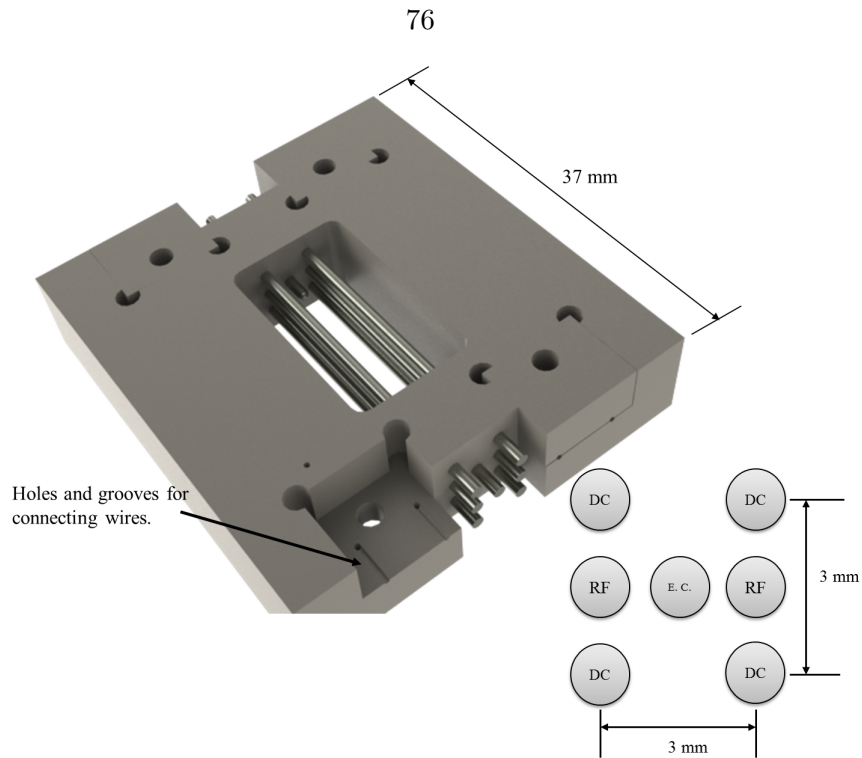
A SolidWorks drawing of the trap and the electrode layout.
